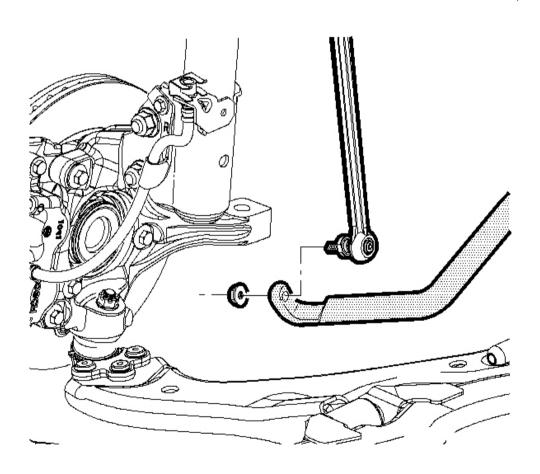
Locating Rod & Bar Courtesy of GENERAL MOTORS CORP.
